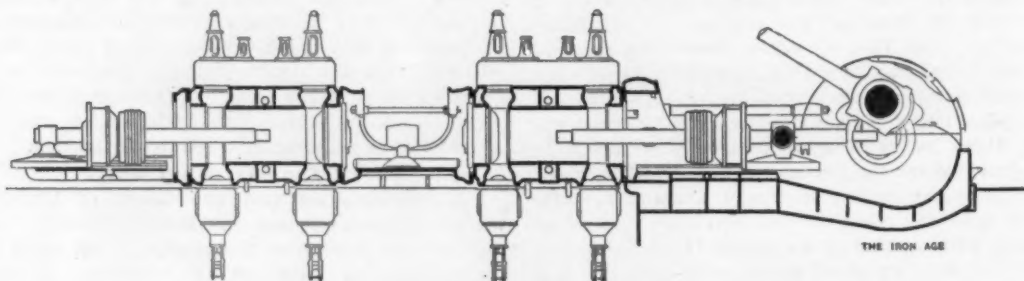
Double Acting Tandem Four-Cycle Gas Engine (Nuremburg).
